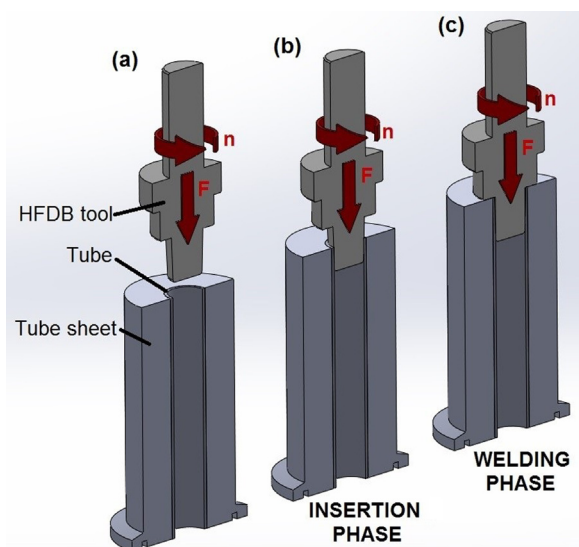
Schematic drawing showing the HFDB for CWHE application. (a) Pre-positioning and rotating of the tool, (b) insertion phase and (c) welding phase.
